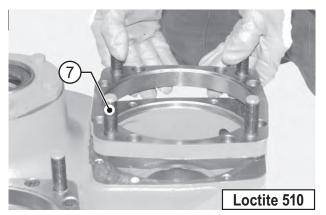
Assemble the cover (7), spreading Loctite 510 on surfaces and screws (9).
